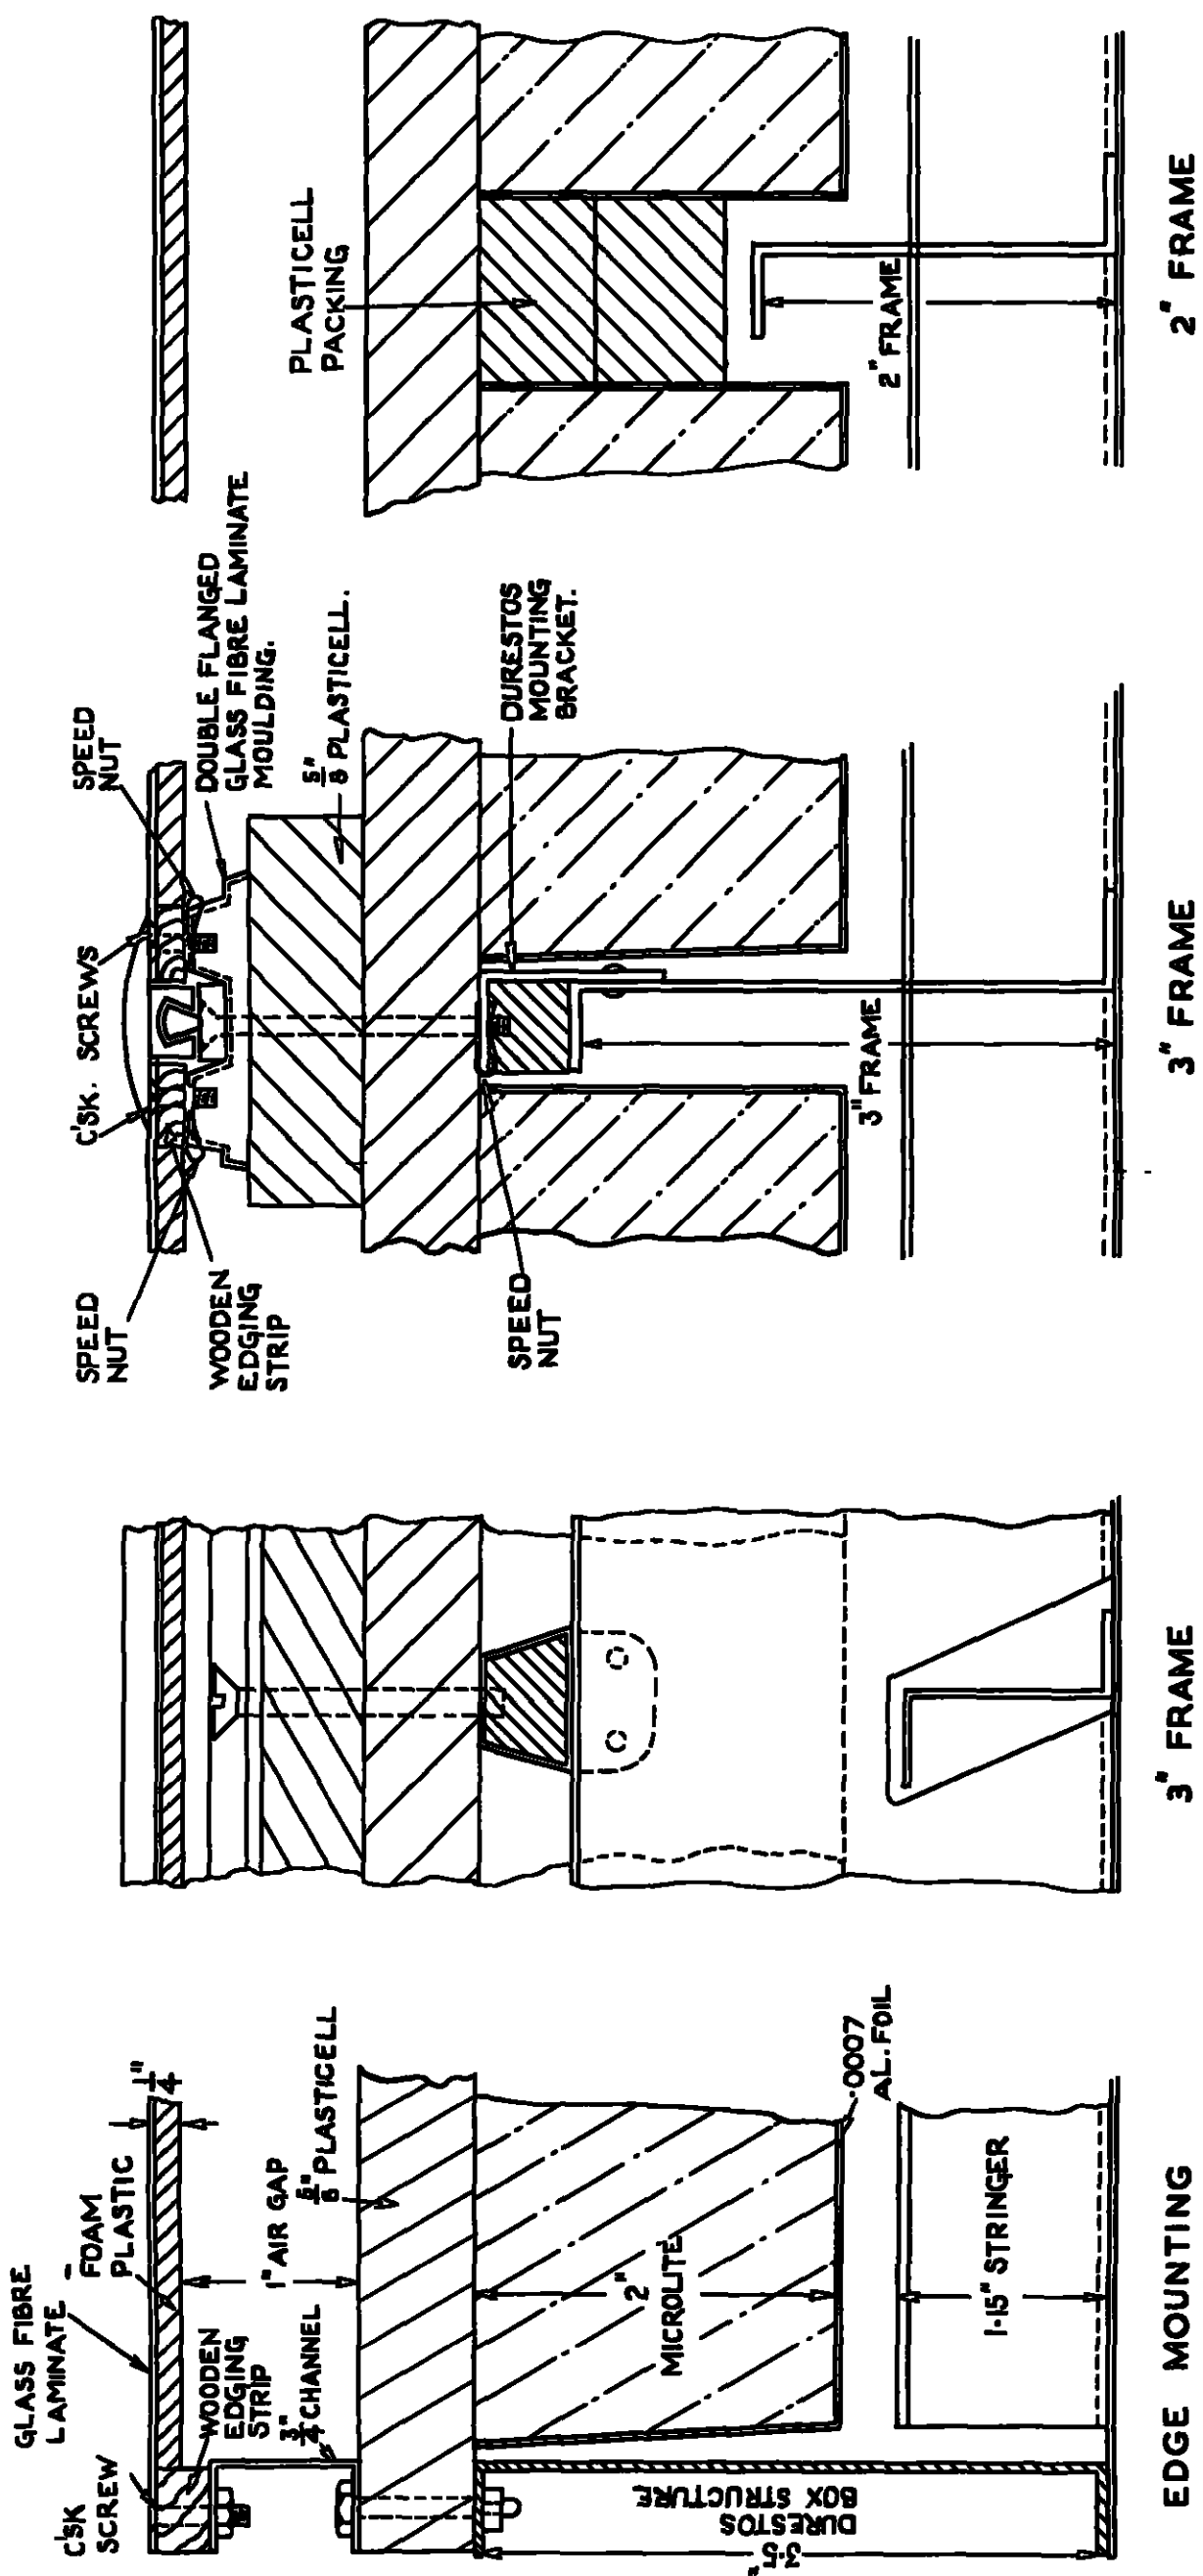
DETAILS OF ATTACHMENT OF INSULATION TO STRUCTURE . PANEL B 198:4
